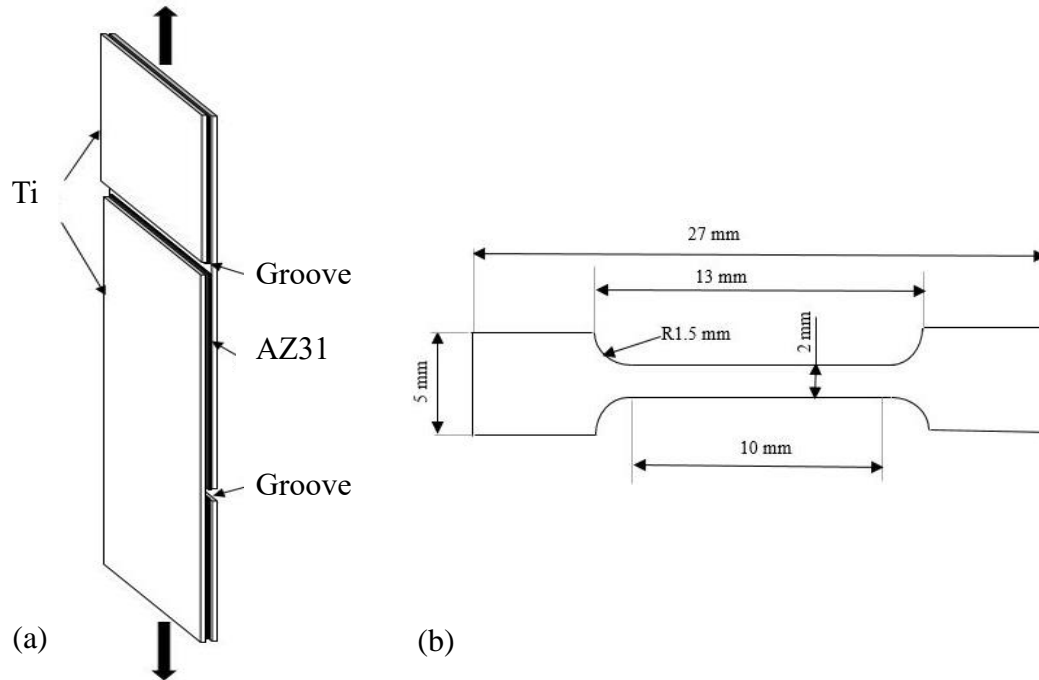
(a) Schematic of the shear test of a trilayer Ti/AZ31/Ti sandwiched structure, and (b) geometrical dimensions of the tension specimens.
